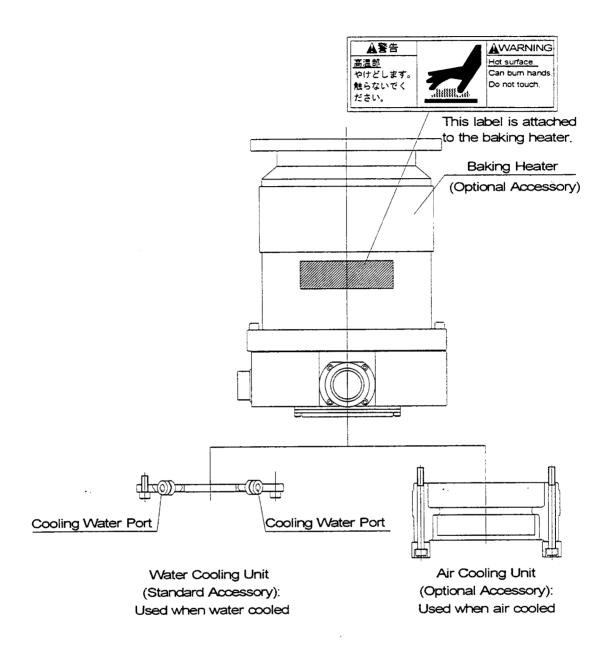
Attaching Positions of the Cooling Unit and Baking Heater
